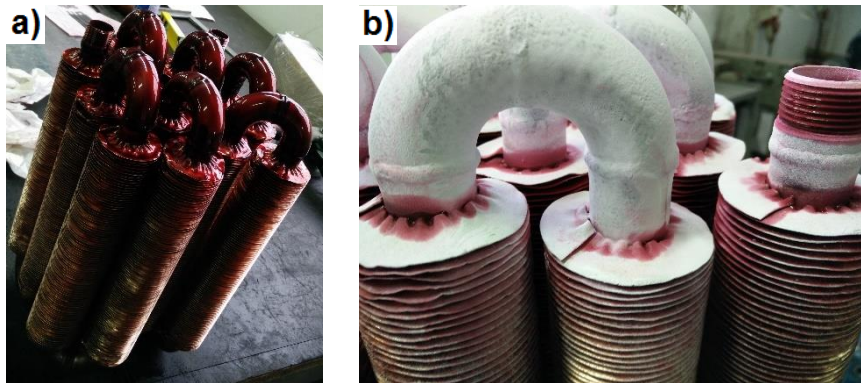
Photographs of the penetrating liquid test on the EHE welding parts: a) application of the penetrating liquid and b) application of the revealing spray.
